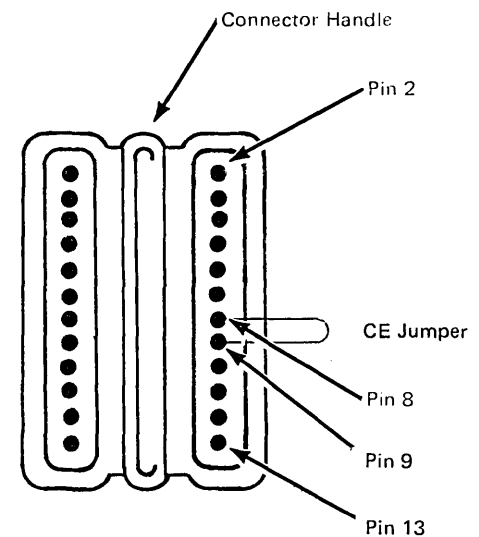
3278 Top-Card Connector CE Jumper (Two Base Cards)
